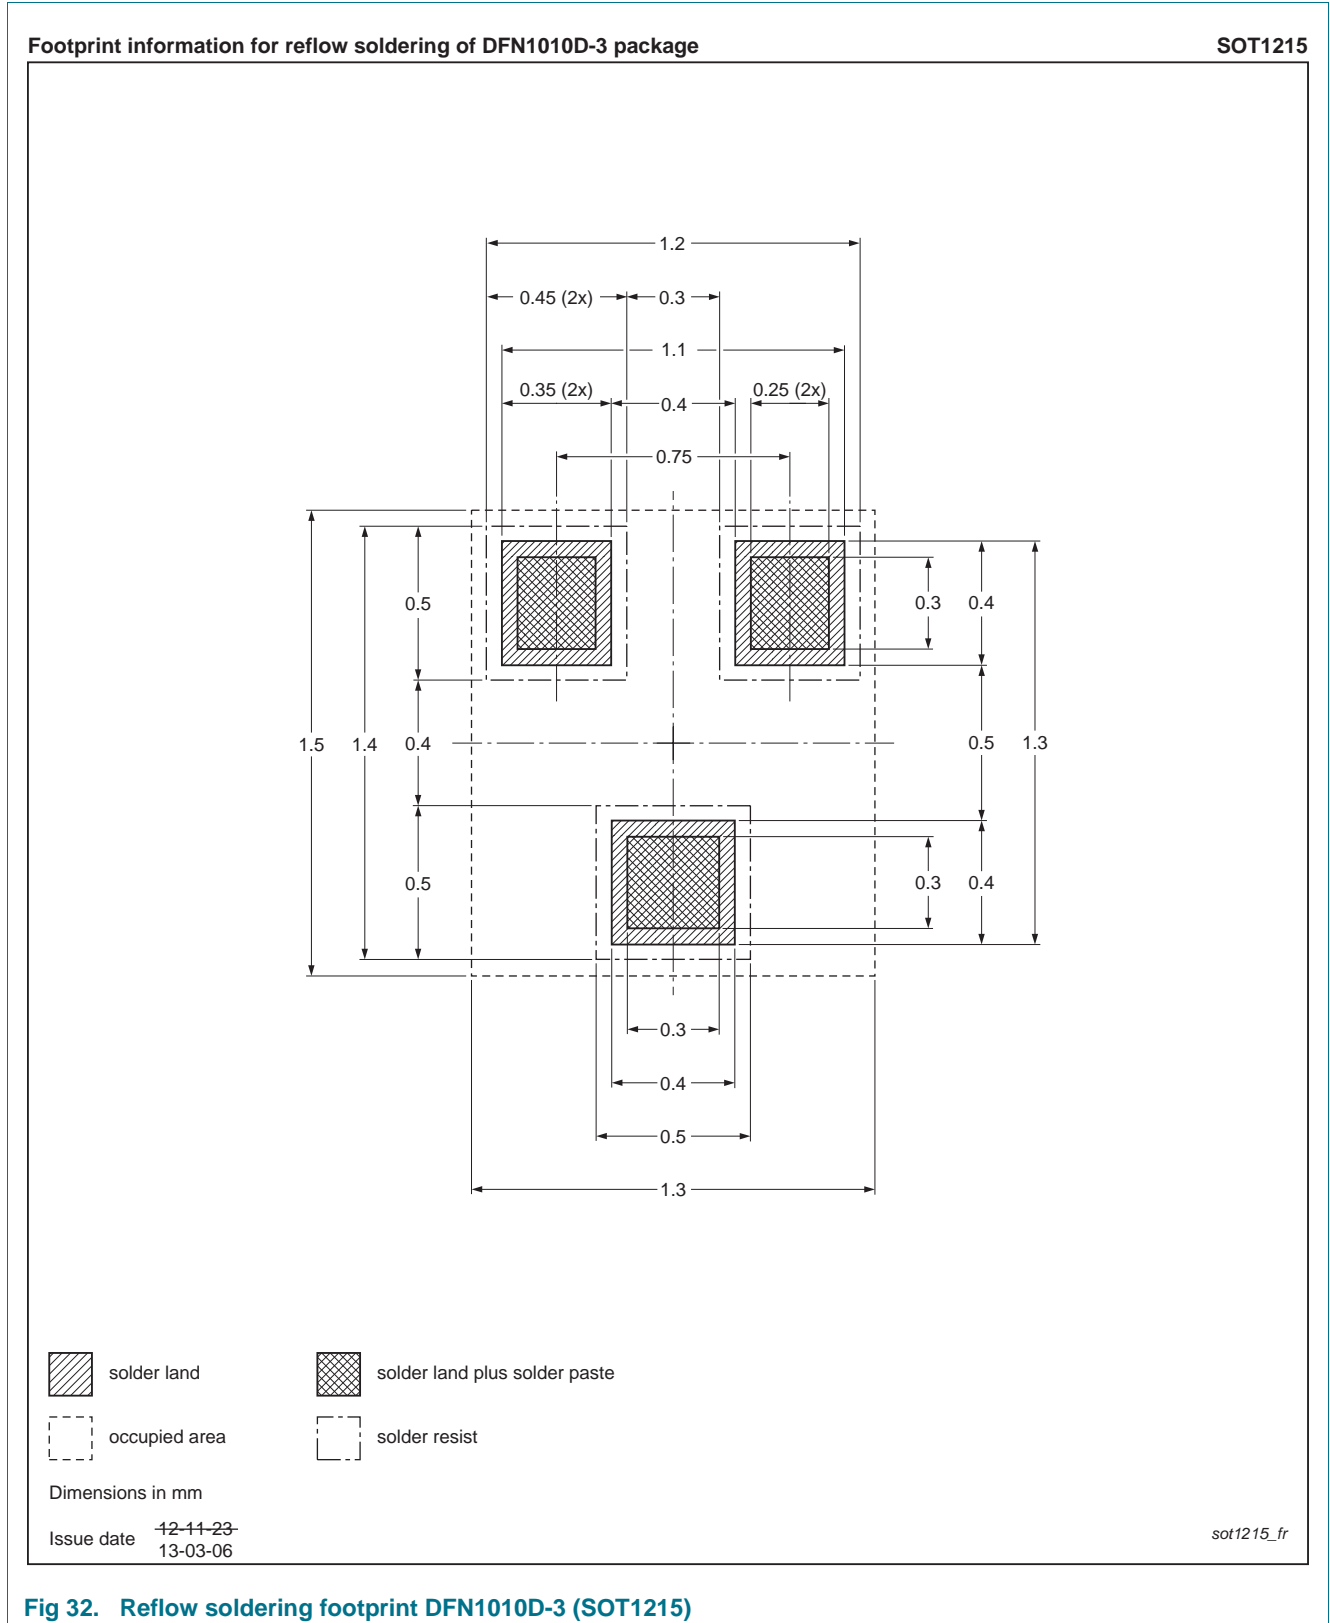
Reflow soldering footprint DFN1010D-3 (SOT1215)
